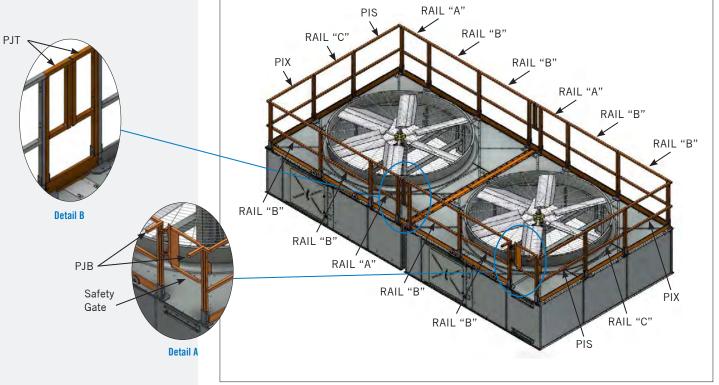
Top Perimeter Guardrails - PFi/PCC-1224
